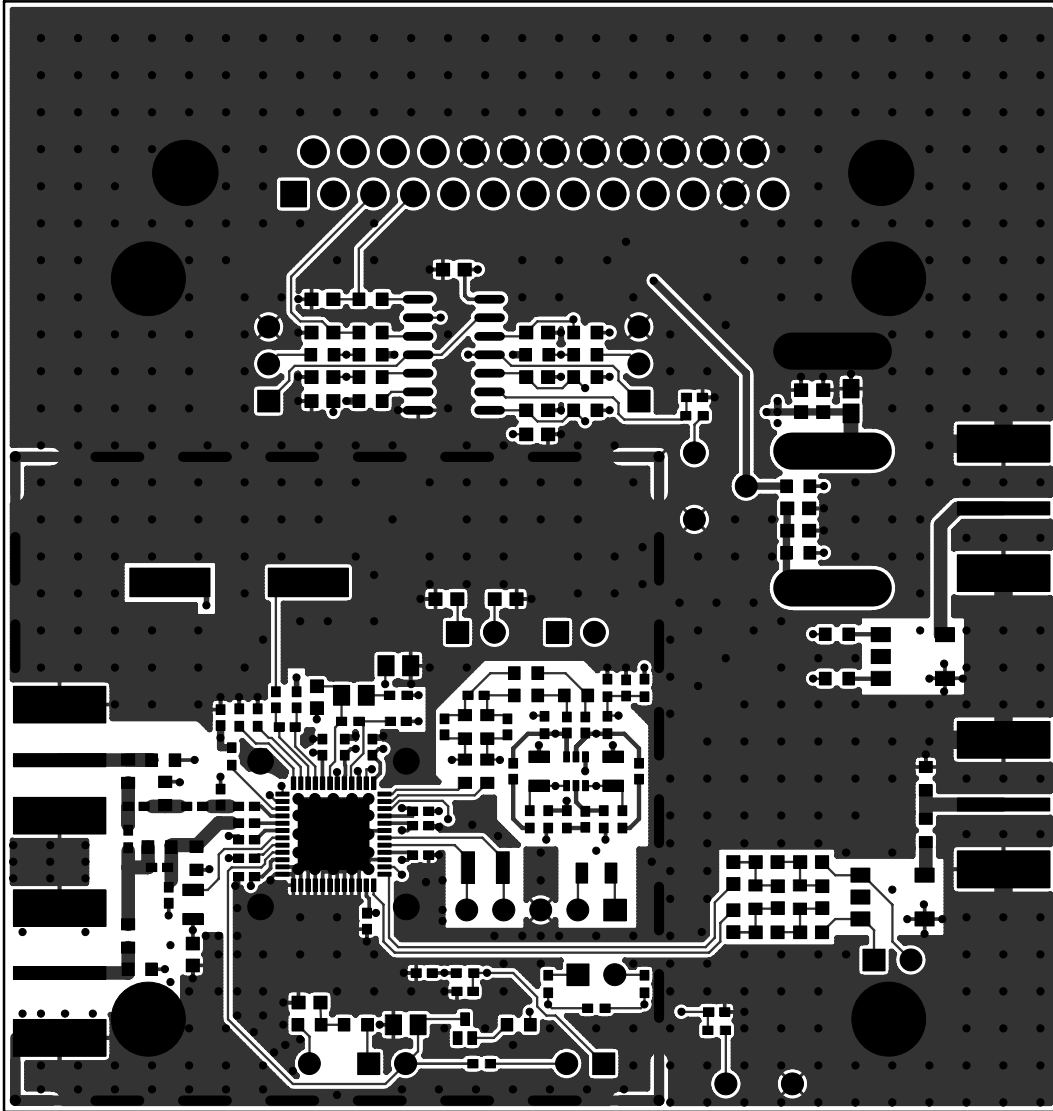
MAX3540 EV Kit PCB Layout—Primary Component Side
